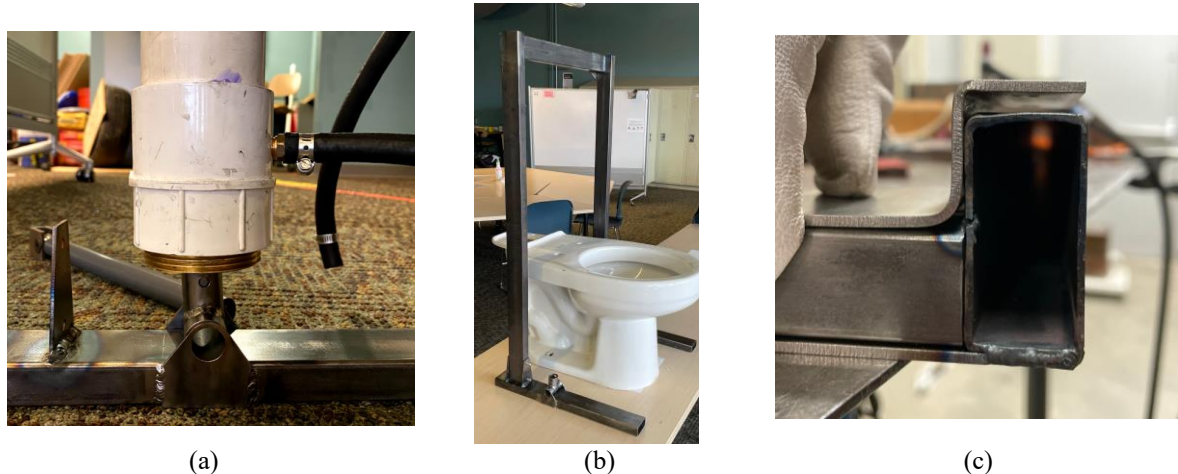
(a) redesigned hydraulic cylinder mount (b) completely welded frame (c) incorrectly machined supports for crossbar
